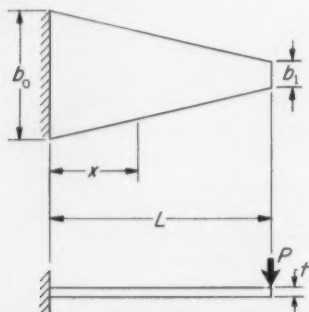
Cantilever trapezoidal beam. Material savings from 0 to 25 per cent in volume are theoretically possible with this type of element
